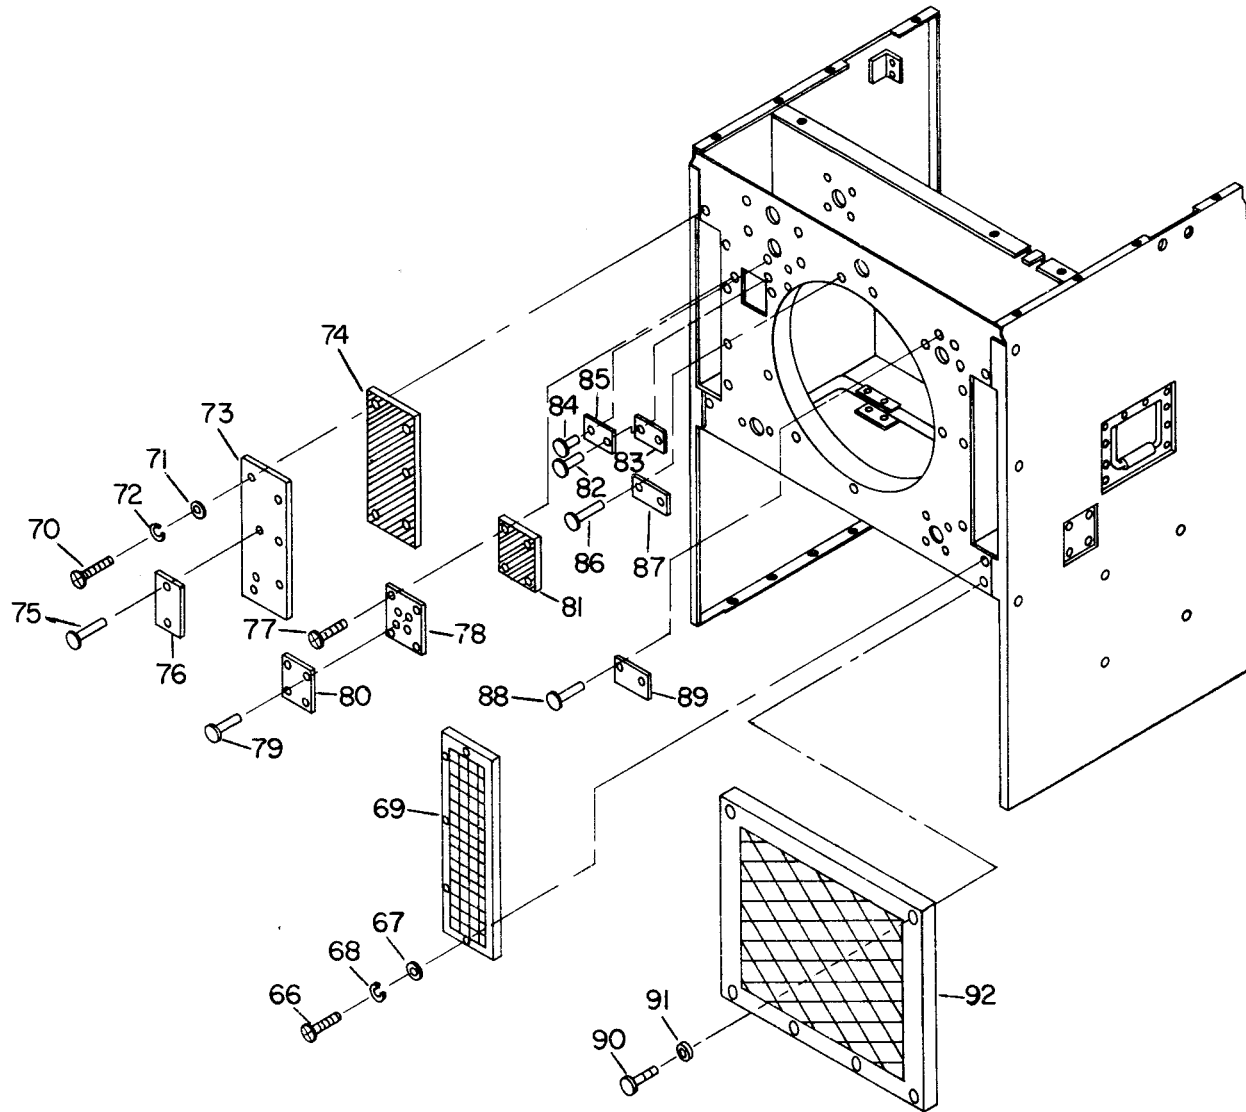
Casing, guards, grilles, drain tubes, panels and filter. (sheet 1 of 2)
